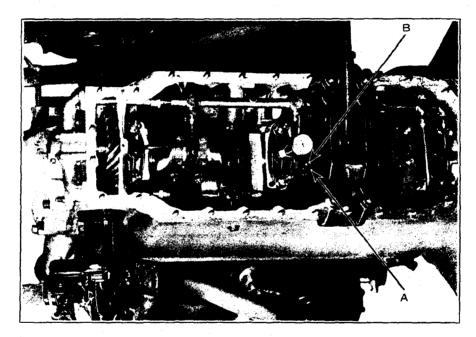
Determining Clearance in Crankshaft Main Bearing
